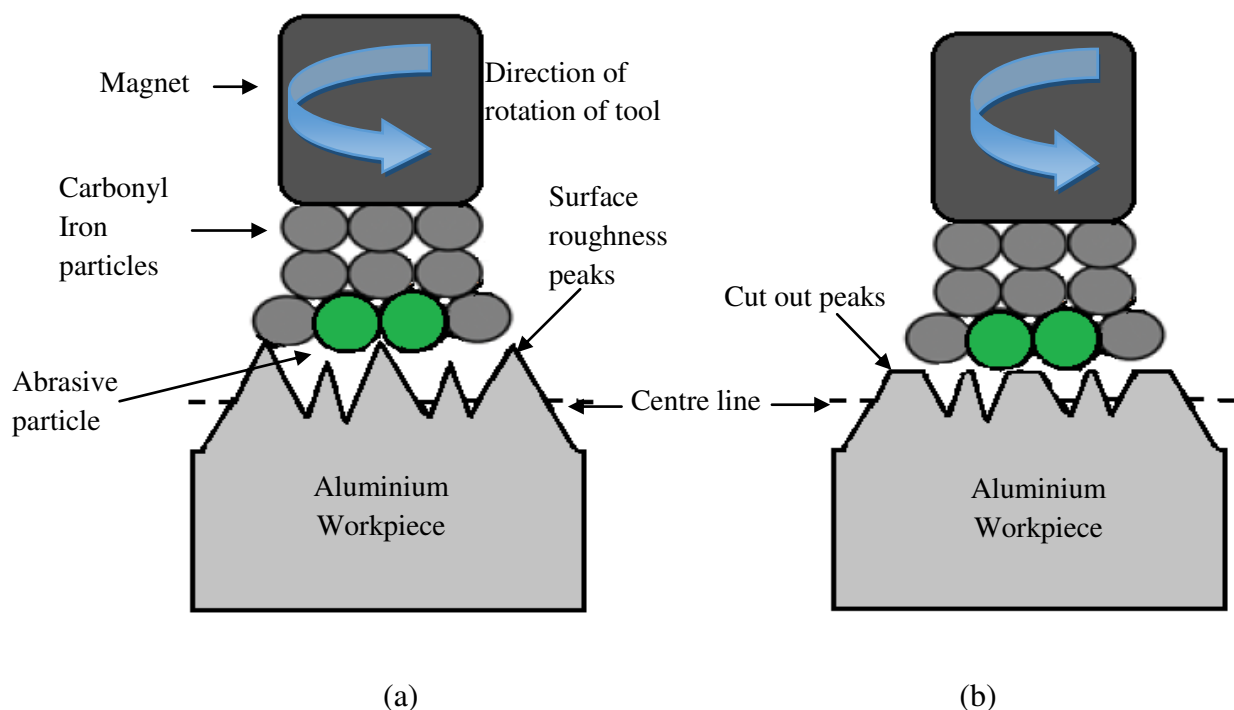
Mechanism of finishing performed by magnetorheological finishing tool.
